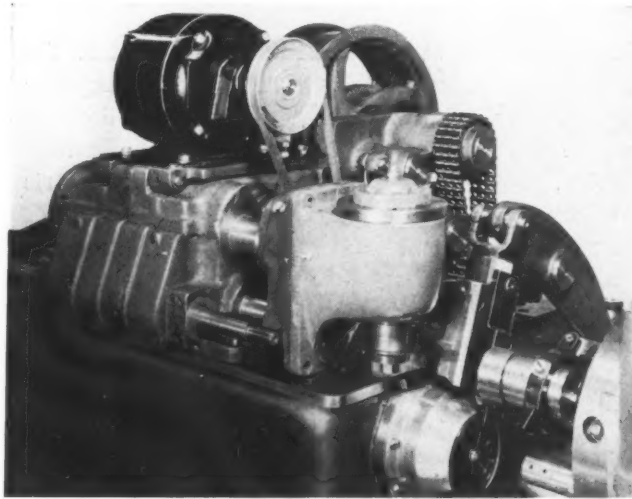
Attachment mounted over spindle head. This drives from its own motor, feed being controlled through auxiliary drum in rear, driven and timed from camshaft
